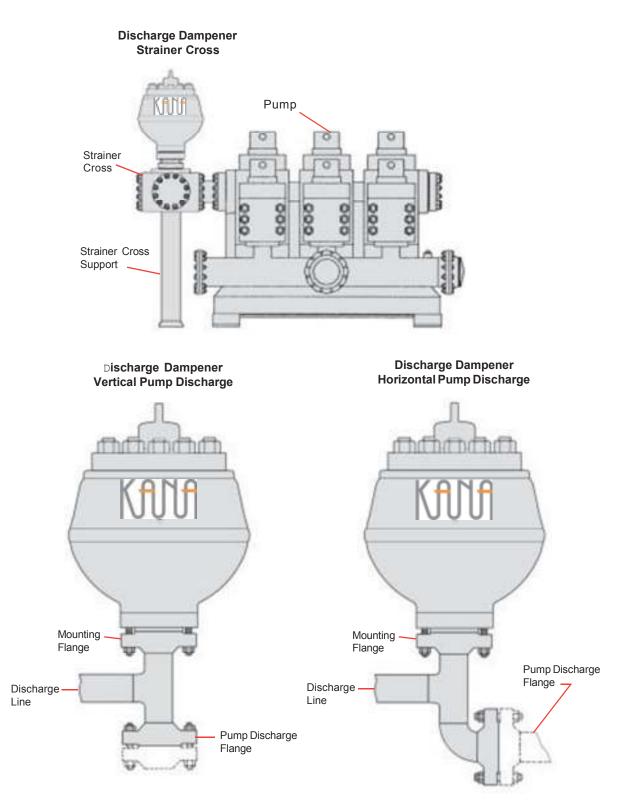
Recommended Installation Piping, Kana-Series Discharge Dampeners
